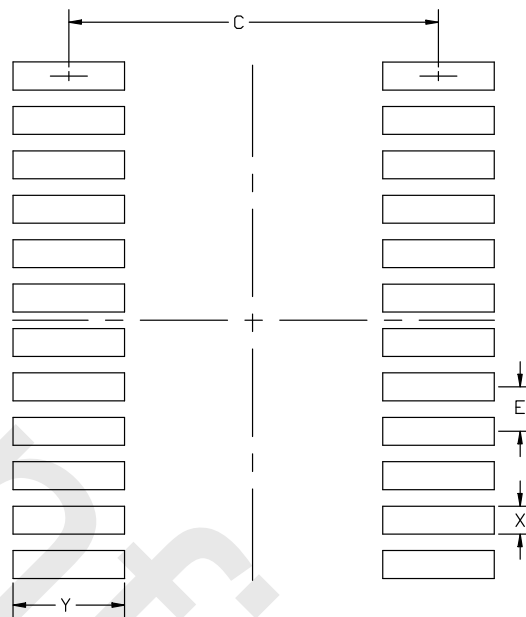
QSOP24 PCB Land Pattern Drawing
